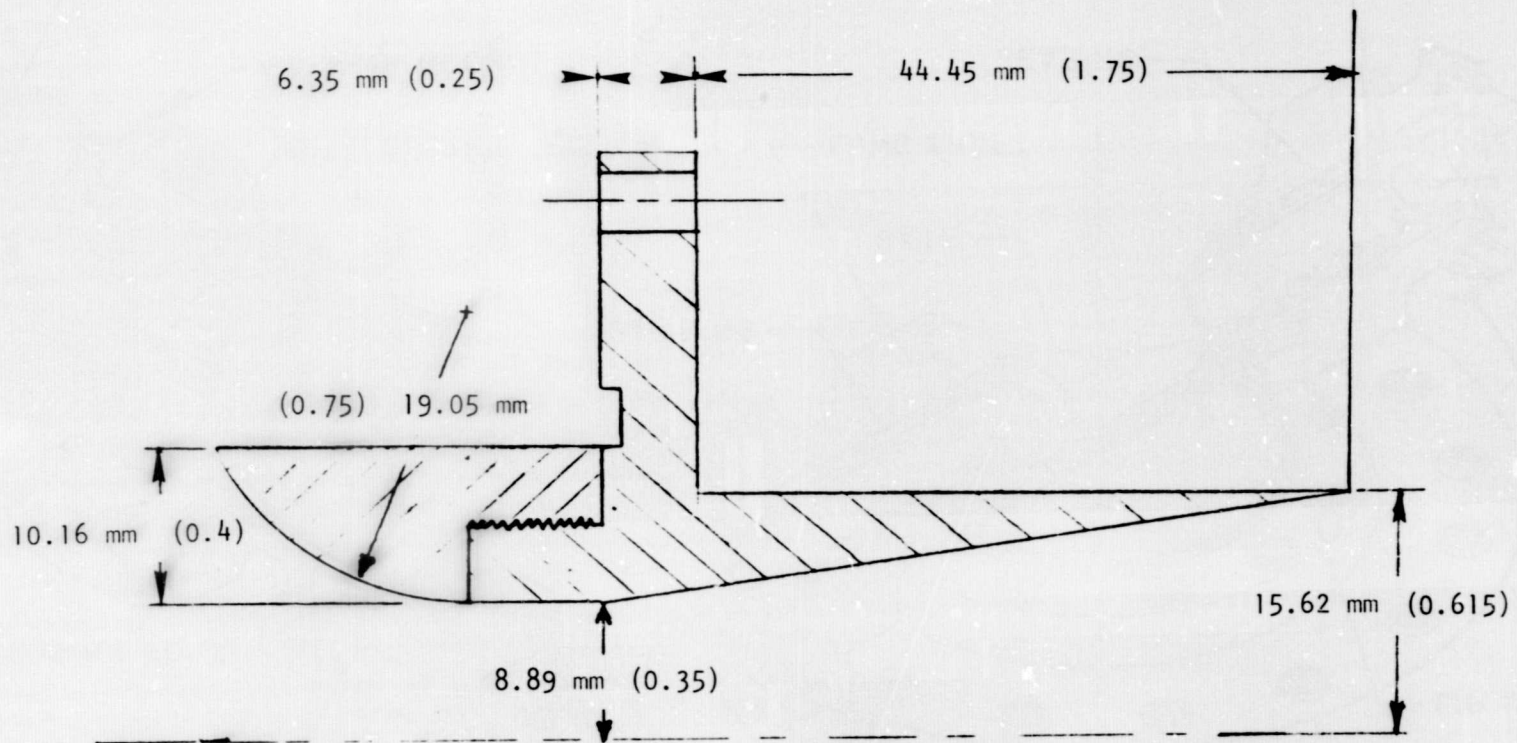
Main Fuel Valve Outlet Flange and Venturi Ring
